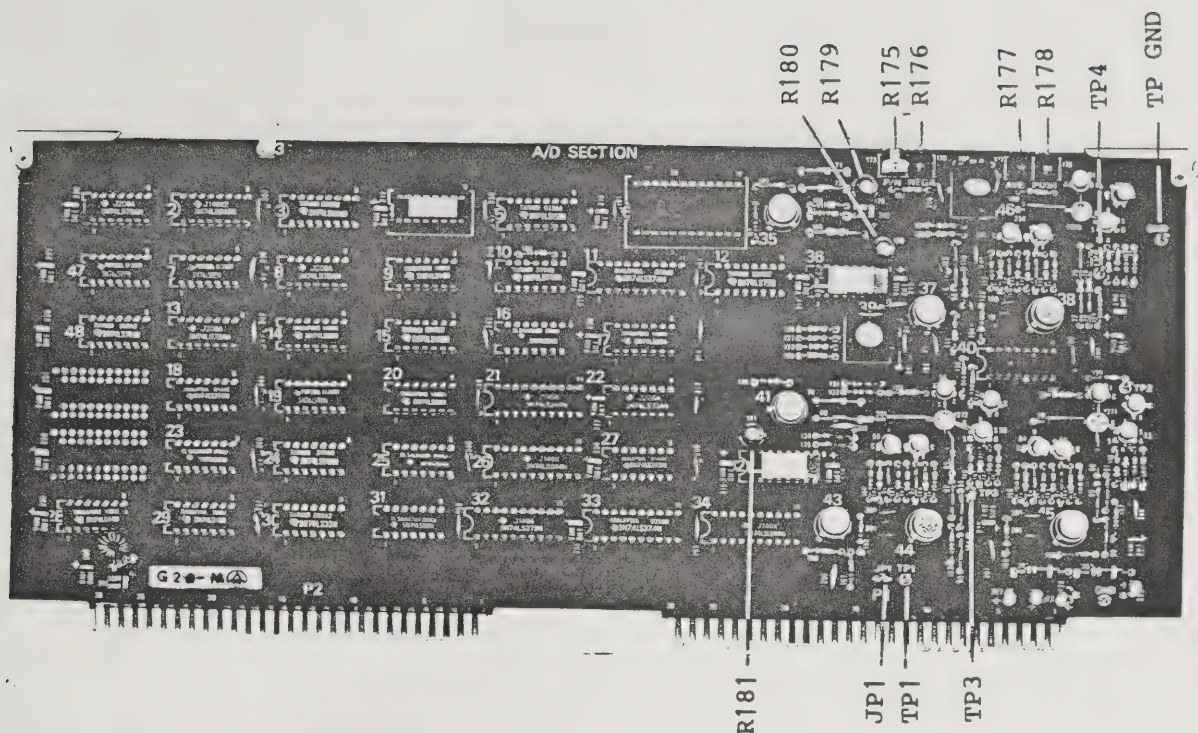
Locations of adjustments and test points on the A-D Converter (BGP-010187) board
